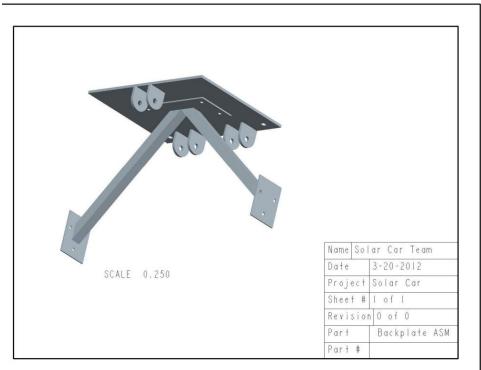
Pro-Engineer model of the back plate and v-arm assembly.
